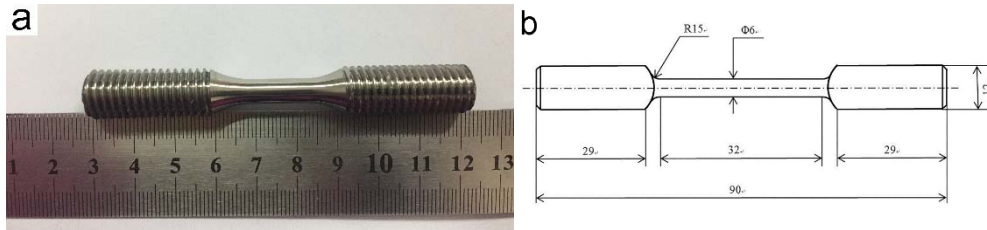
(a) Actual solid specimen; (b) detailed dimensions of specimen (dimension in mm).
